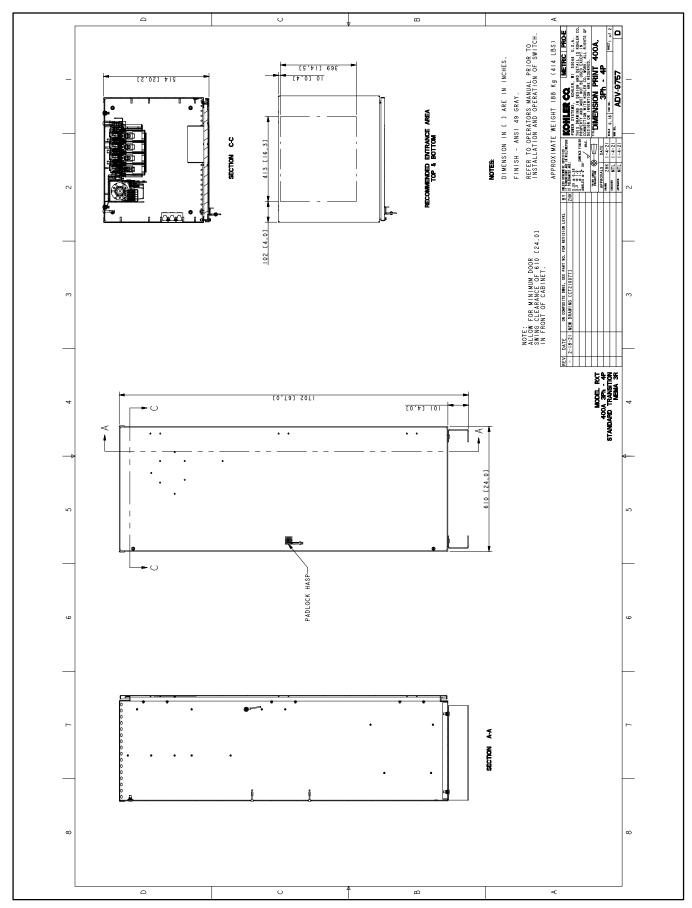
Enclosure Dimensions, 400 Amp, 3-Phase, 4-Pole, ADV-9757, Sheet 1
